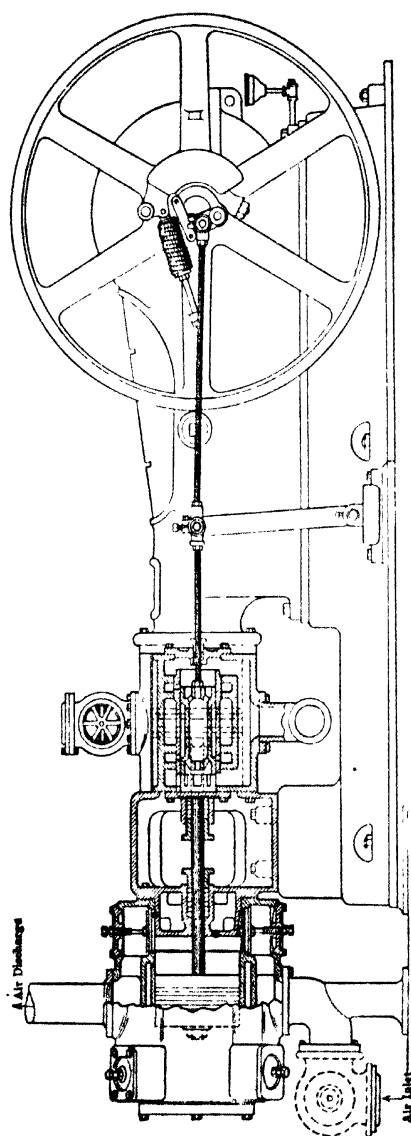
Ingersoll-Rand Straight-Line Compressor, Class "FR-1".
